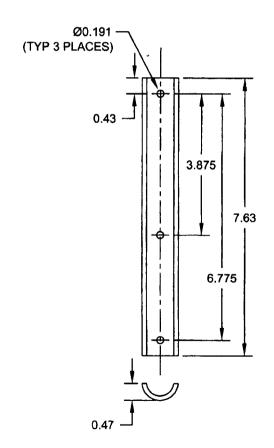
SADDLE (SHEET 3): Ø0.257 TYP 3 PL WAS Ø0.191 (TYP 3 PLACES) AS SHOWN:
